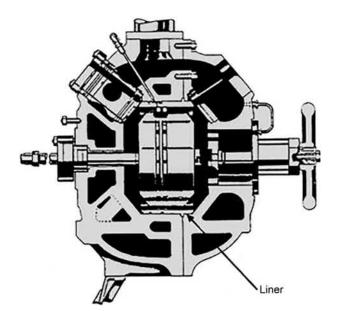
Sectional view of a compressor cylinder showing the cylinder liner.
